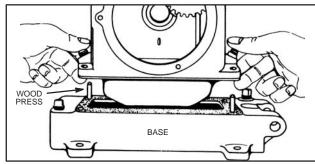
MOUNTING CRANKCASE MODEL FH
